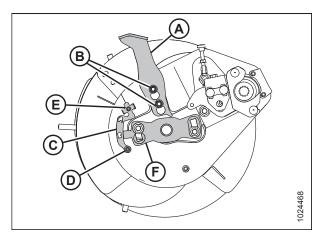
Bumper and Indicator Plate Installed on Left End of Feed Auger
